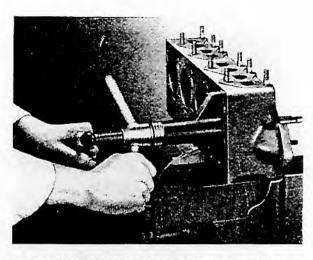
REMOVING VALVE GUIDE USING SERVICE TOOL MF60A
